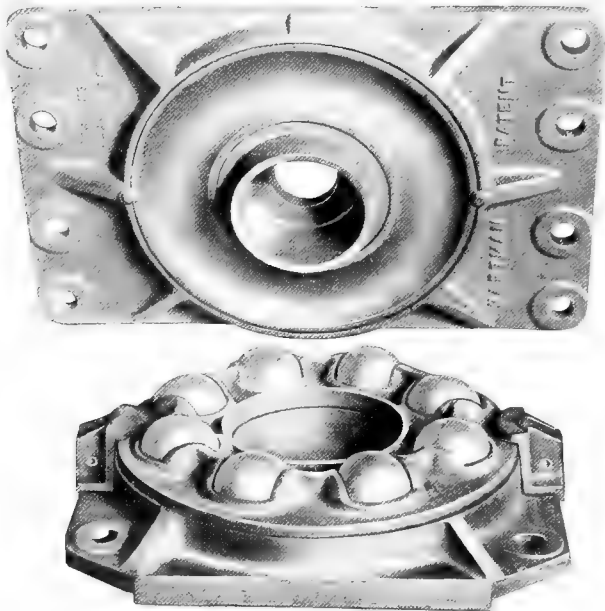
Hartman Ball Bearing Center Plate. Joliet Railway Supply Company.
